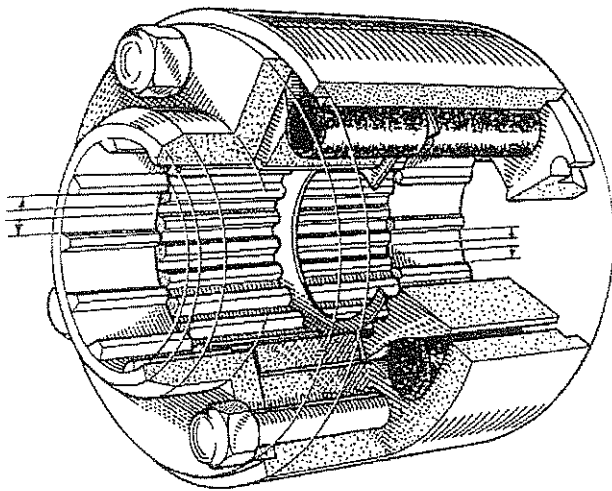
Diagram of flexible coupling for clutch-gearbox shafts.
